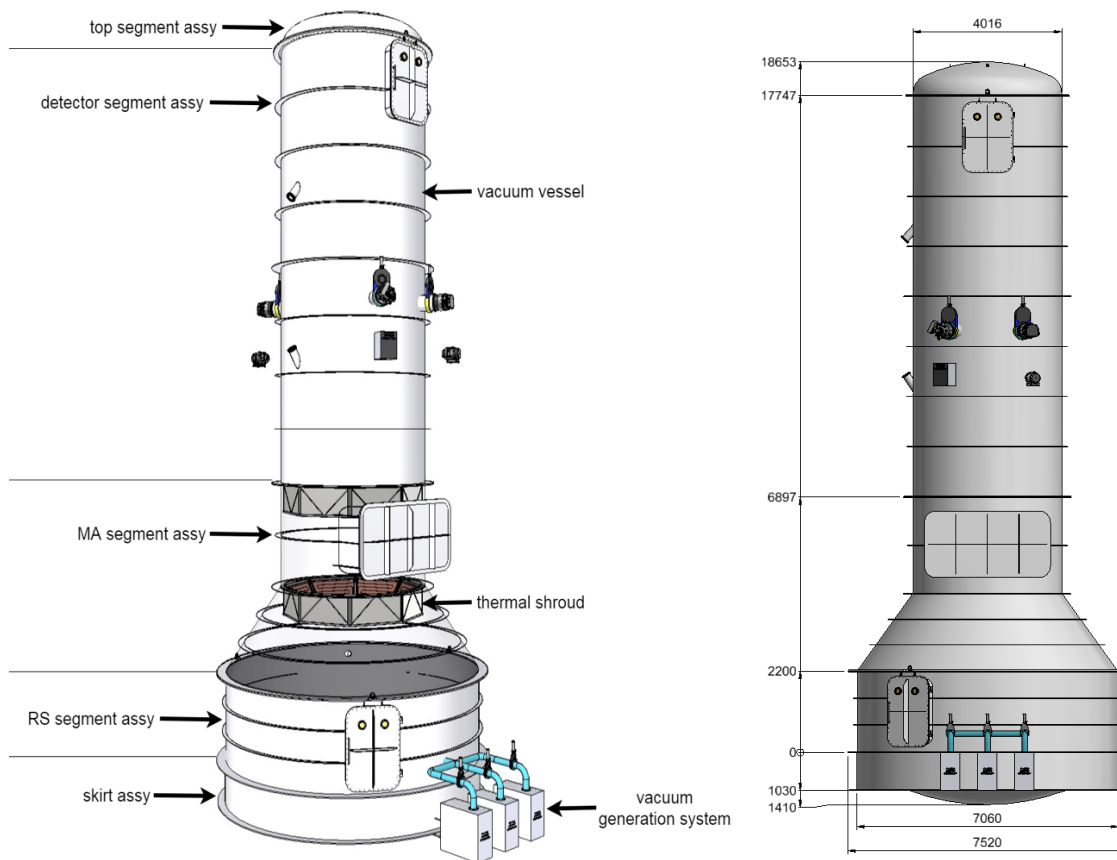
Thermal vacuum chamber elements and main dimensions.
